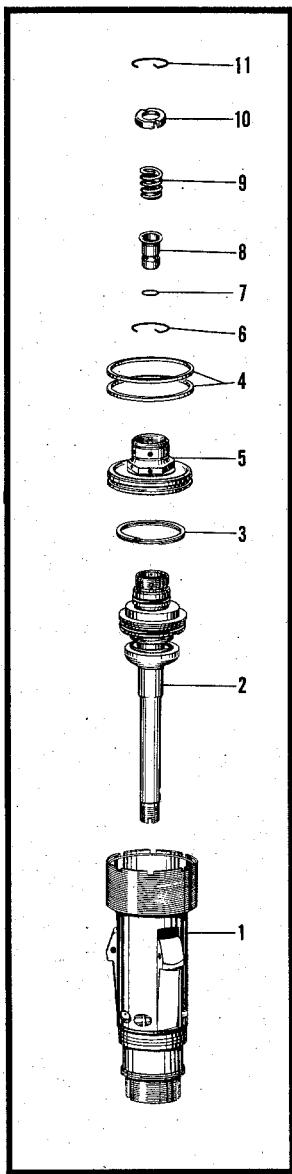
Installation of Servo Piston Shaft, Piston, and Servo Valve into Lever Sleeve
